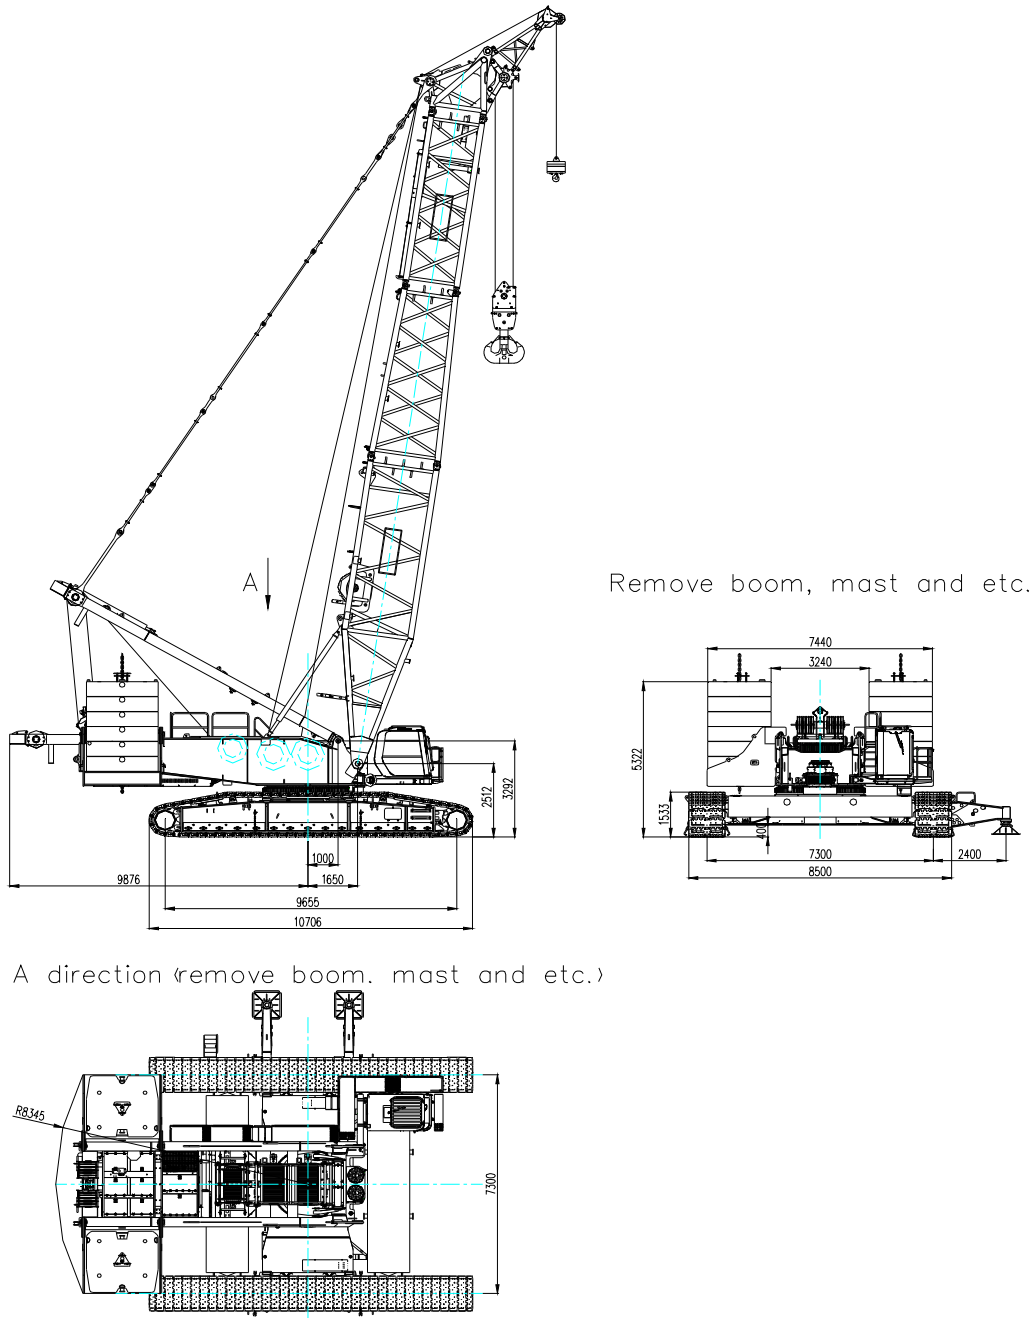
XGC400-I crawler crane outline dimension (standard working condition)
